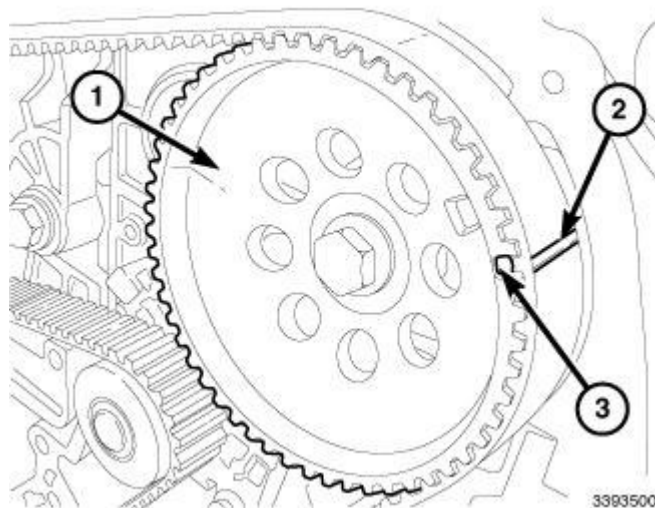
Camshaft Sprocket, Timing Marks On Belt & Camshaft Drive Gears
